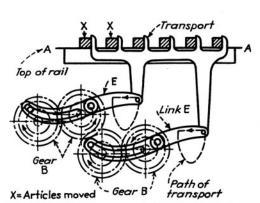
An arrangement of interconnected gears of equal diameters which will impart a transport motion to a mechanism, the gear and link mechanism imparting both the forward motion and the raising and lowering. The gear shafts are supported in the frame of the machine.
